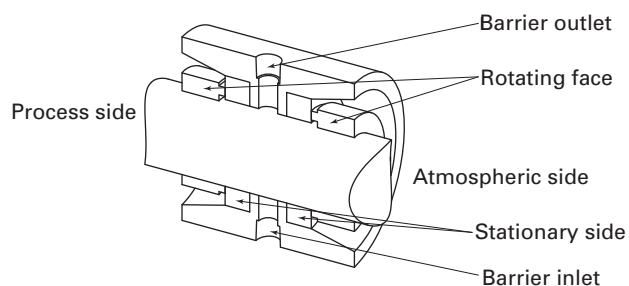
Dual Pressurized Mechanical Seal for Top Entry Agitator
